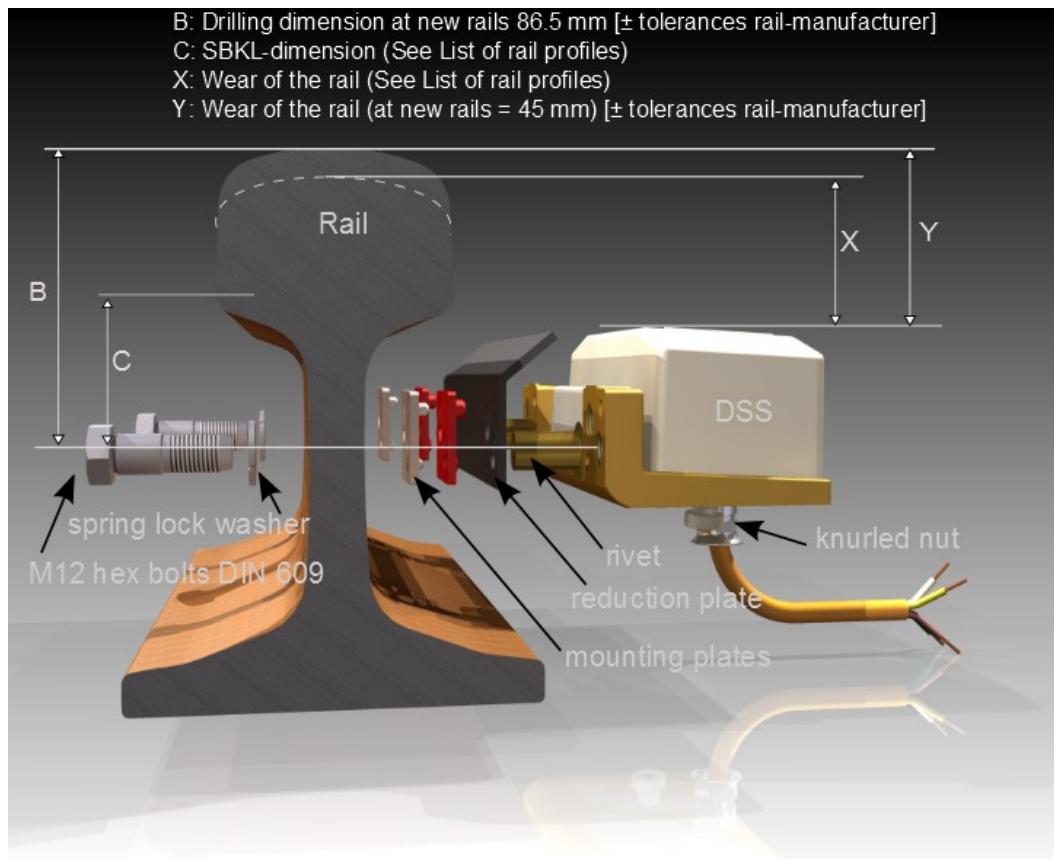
Double wheel sensor installation drawing (with reduction plate)
